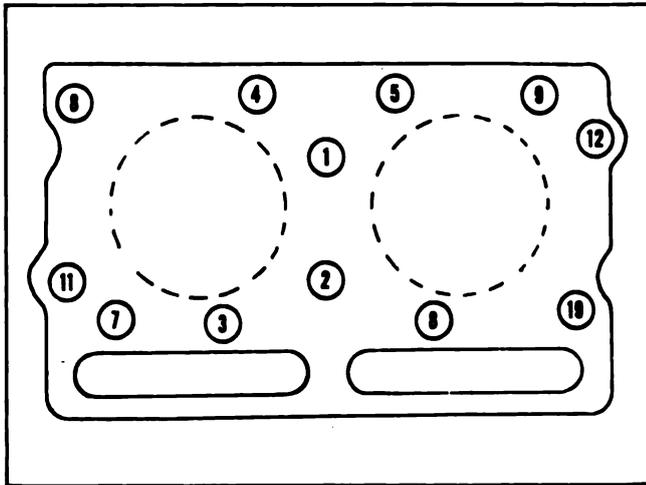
(N11427). Tightening Sequence For The Cylinder Head Capscrews.
